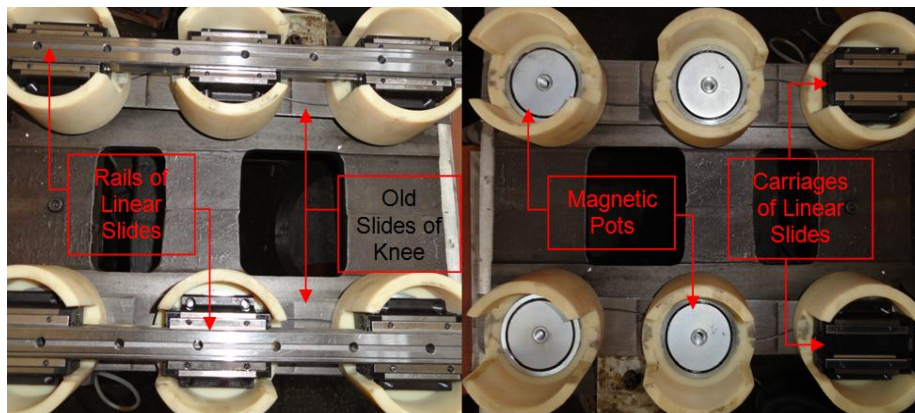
Ball linear slides (Rail + Carriage) to column-knee assembly
